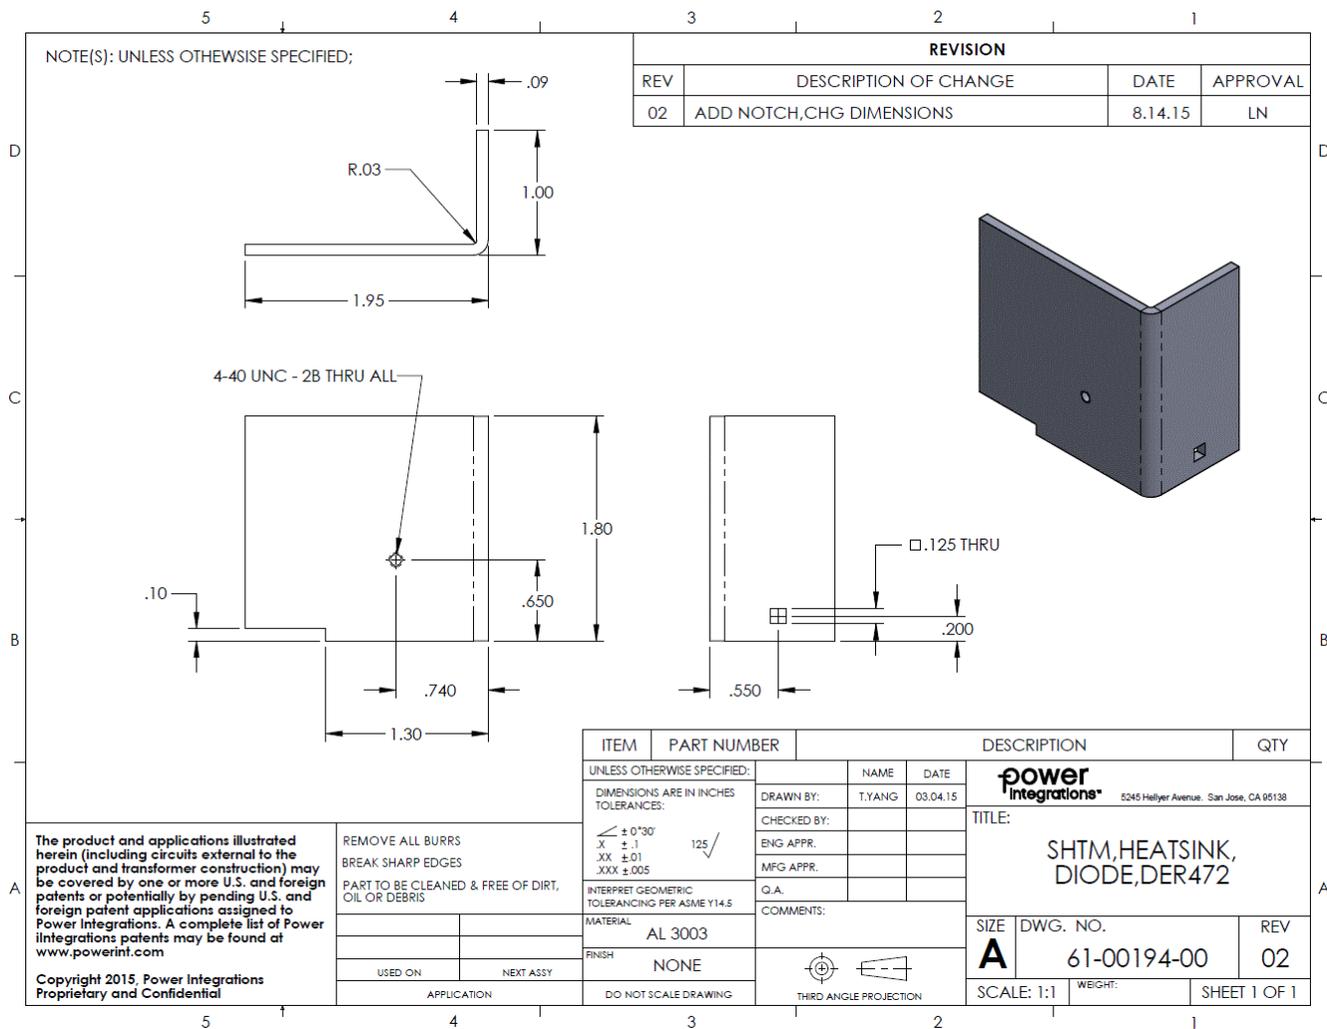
DER-472 Output Rectifier Heat Sink Sheet Metal Drawing.
